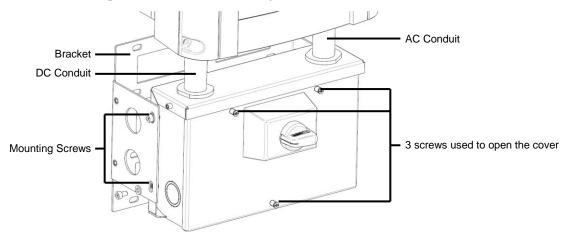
Attaching the AC/DC Safety Switch to its Mounting Bracket
